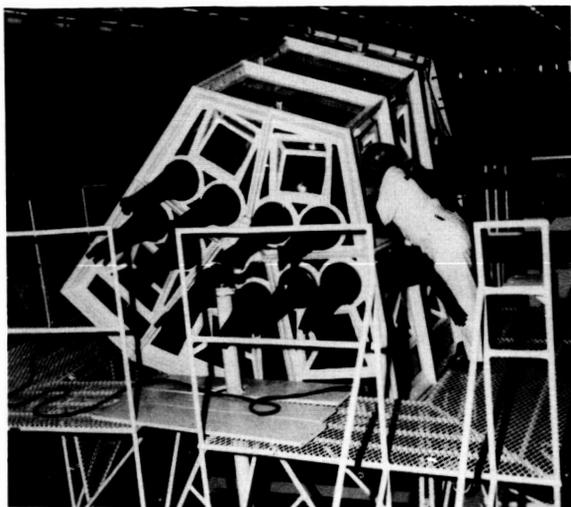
Plexiglas welding boxes.
